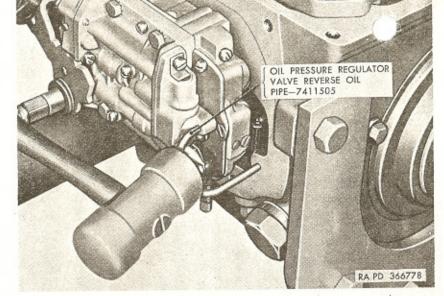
Installing oil pressure regulator valve reverse oil pipe.
